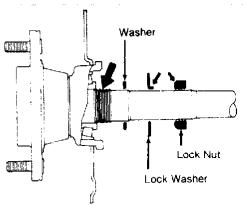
Removing Rear Axle Bearing (Montero) Courtesy of Mitsubishi Motor Sales of America.
